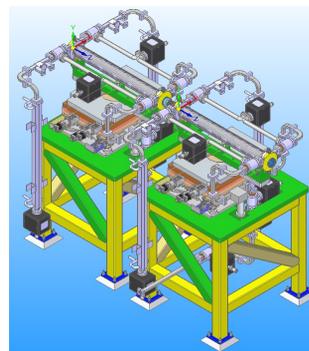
Technical drawing of the supports for the two PolariX TDSs at FLASH2. Courtesy of M. Föse.
